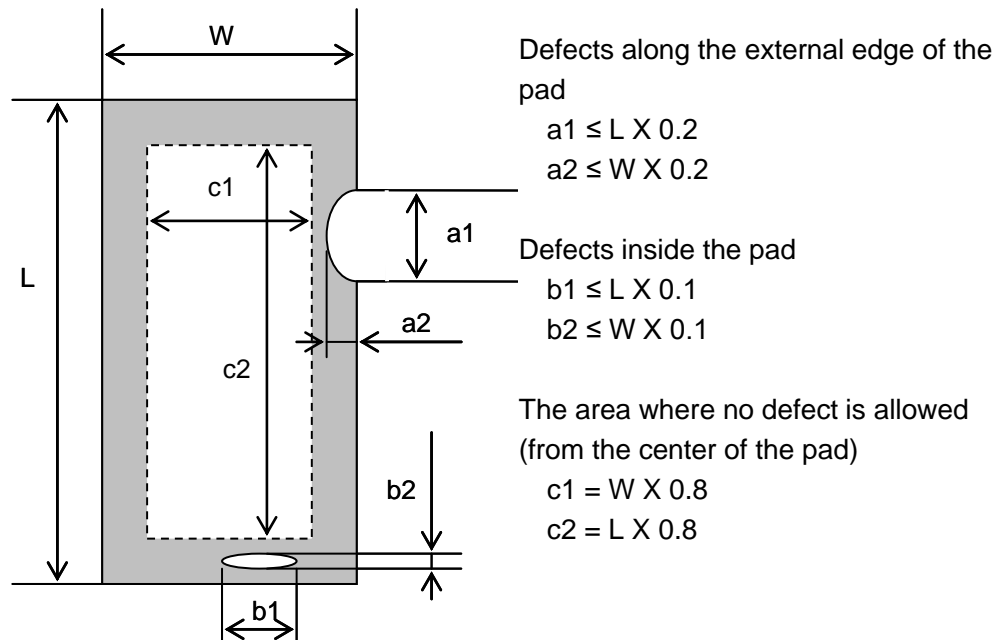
Passing Criteria for Defects on the Rectangular Surface Mount Pad
